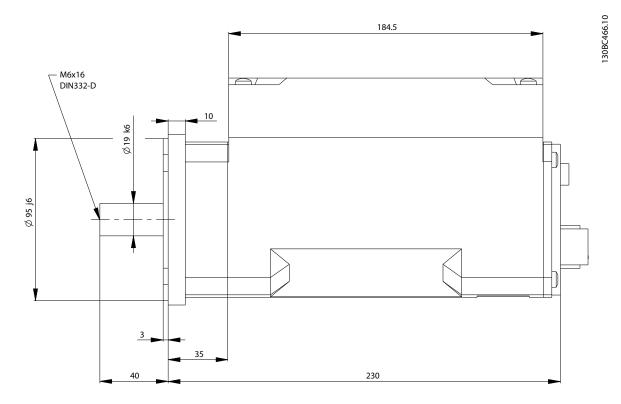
Side View: Servomotor with ISD Flange, without Brake
